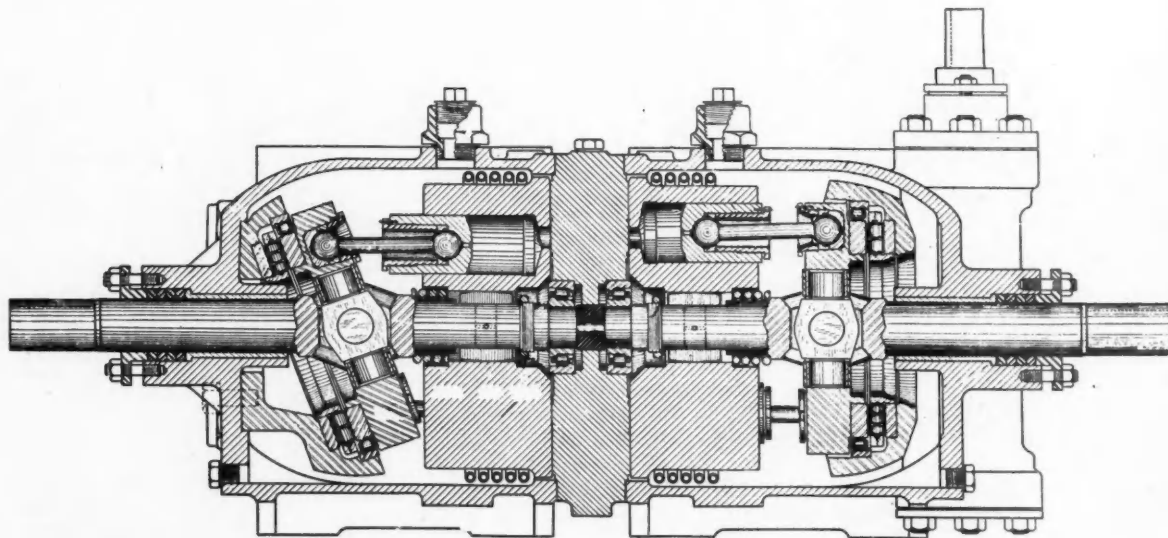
Waterbury hydraulic torque converter (Hydrostatic type)
